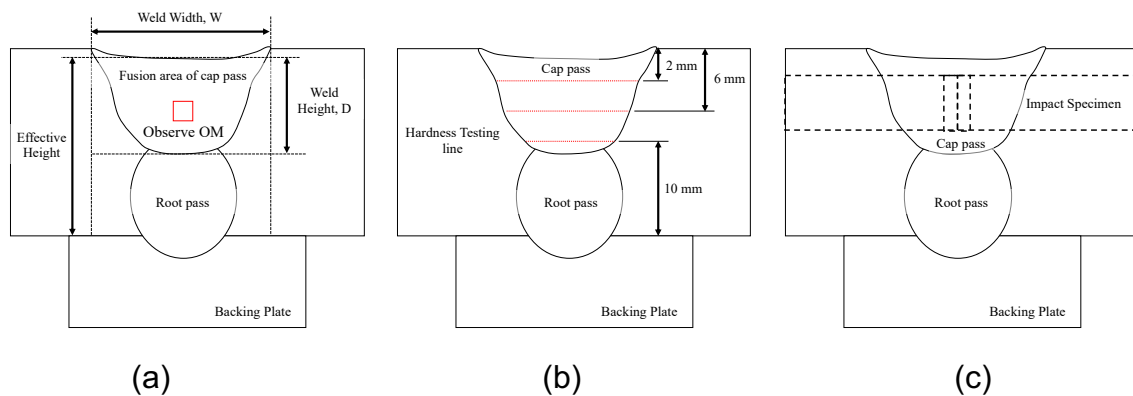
Schematic illustration of (a) weld profile parameters, (b) location of Vickers hardness testing, (c) location of Charpy impact testing
